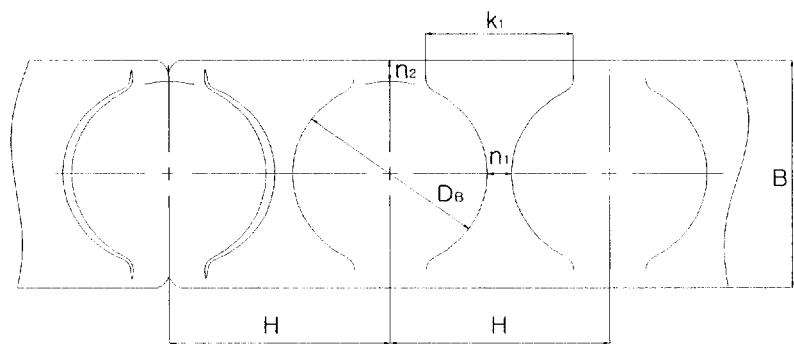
Various dimensions on the scrap strip of circular lancing type drawing
